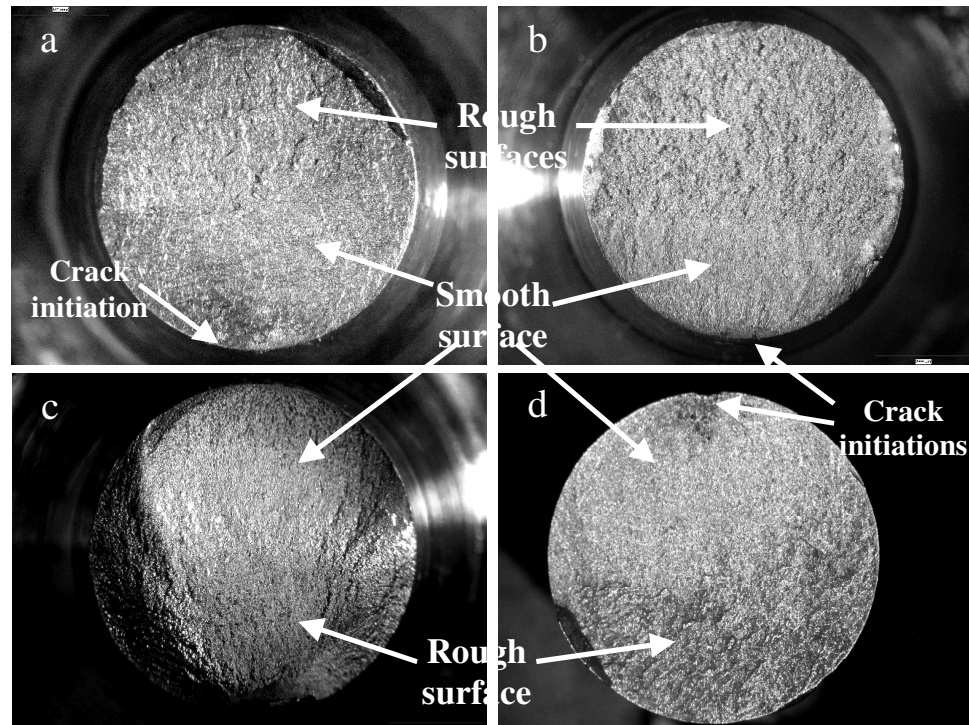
Fracture surface of a) AD, b) BD, c) AX, d) BX
